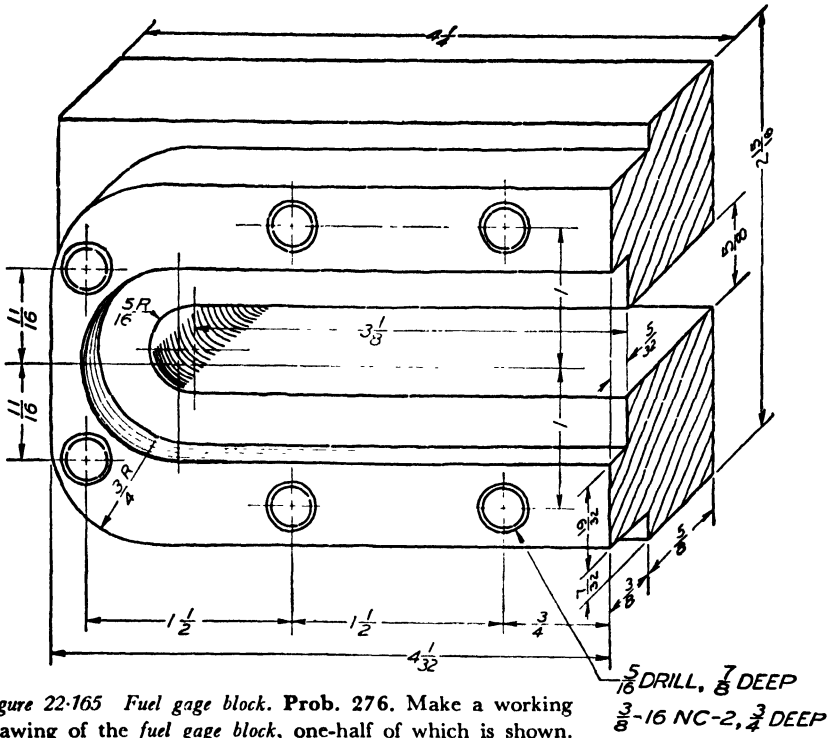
Fuel gage block. Prob. 276. Make a working drawing of the fuel gage block, one-half of which is shown. Material is machine steel. Finish all over.
